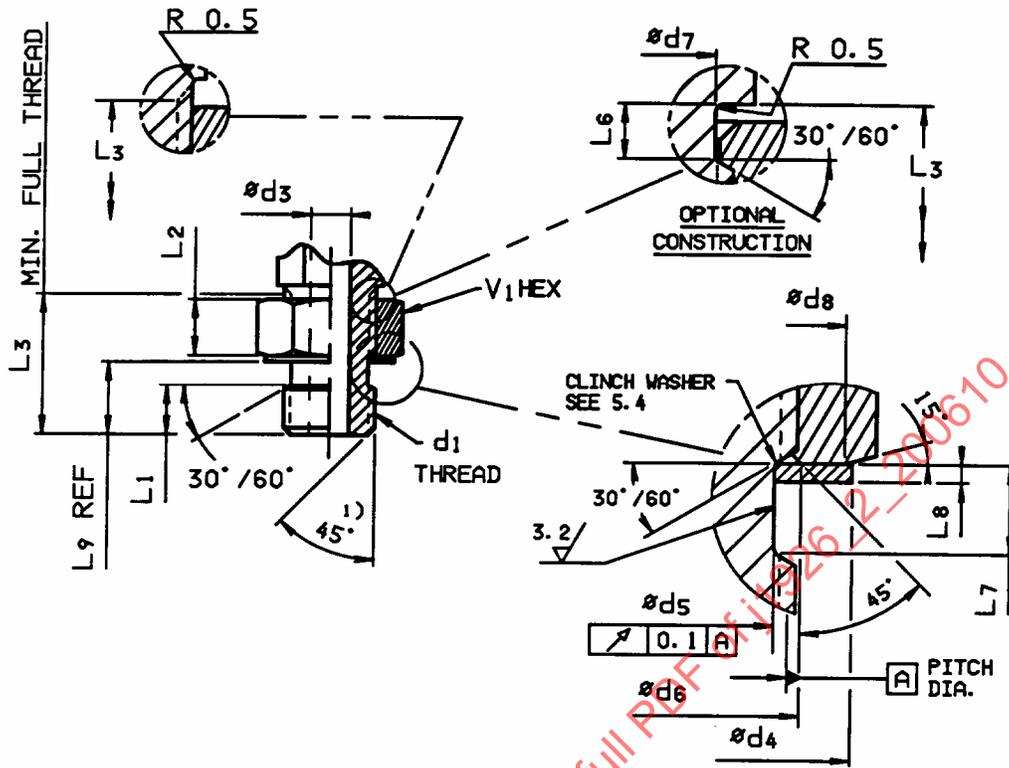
A - ADJUSTABLE SAE J1926-2 HEAVY-DUTY (S SERIES) STUD END DETAIL
